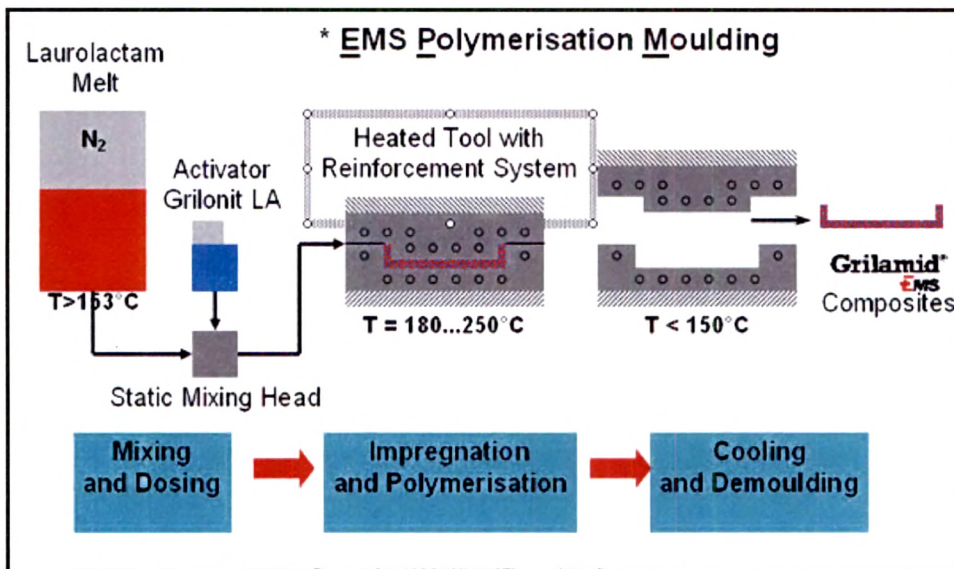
Liquid-Moulding of Thermoplastic Composites
